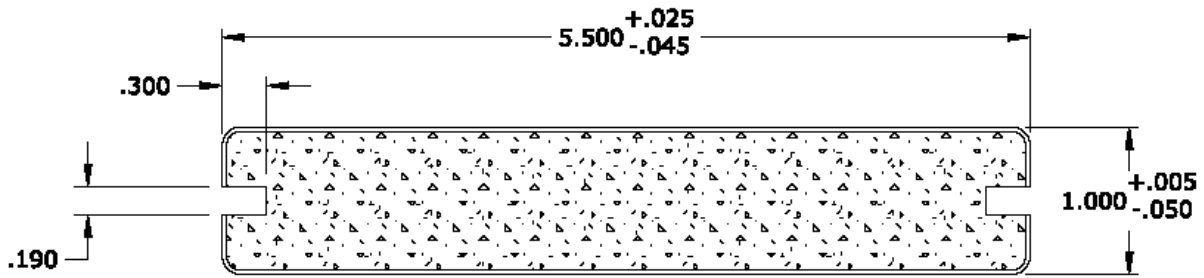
ENDECK® GROOVED EDGE DECK BOARD
